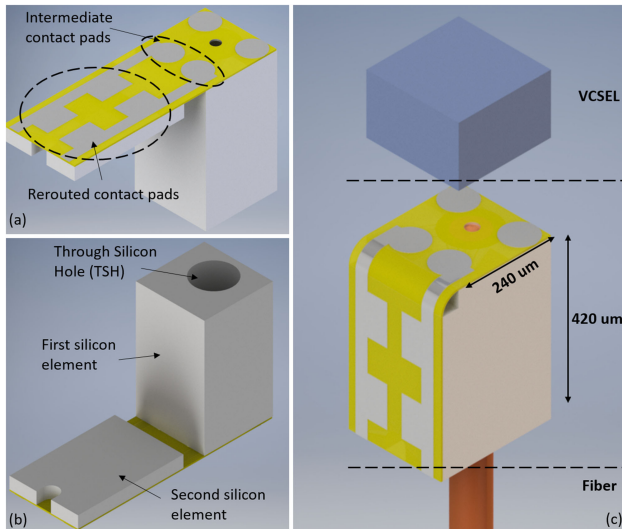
ODLM design. (a) Unassembled F2R interposer; (b) backside view of unassembled F2R interposer; (c) assembled F2R interposer with flip chipped VCSEL and inserted optical fiber.
